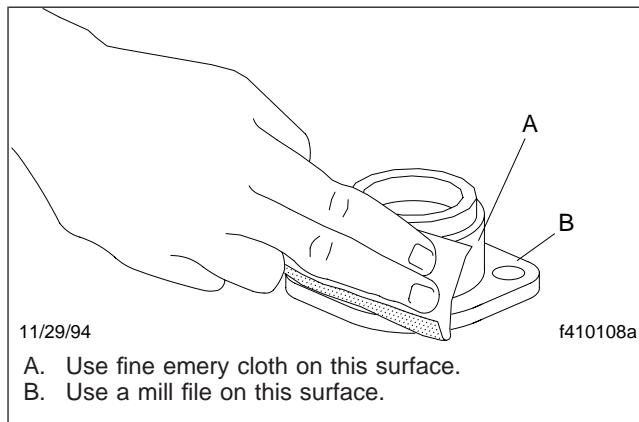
, Smoothing a Full-Round Yoke U-Joint Bearing Cup
